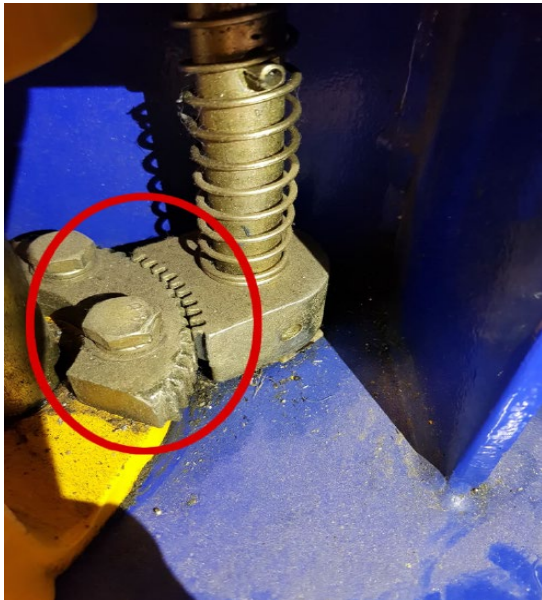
Locking mechanisms gears too far apart. Locking mechanism gears do not engage due to excessive clearance between teeth. Vehicle hoist arms can move.
